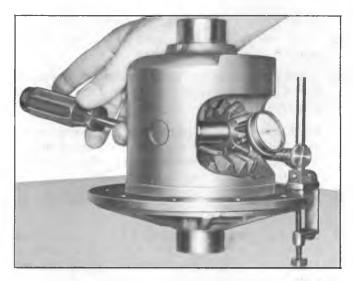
E-Measuring Pinion Gear Tooth Clearance
